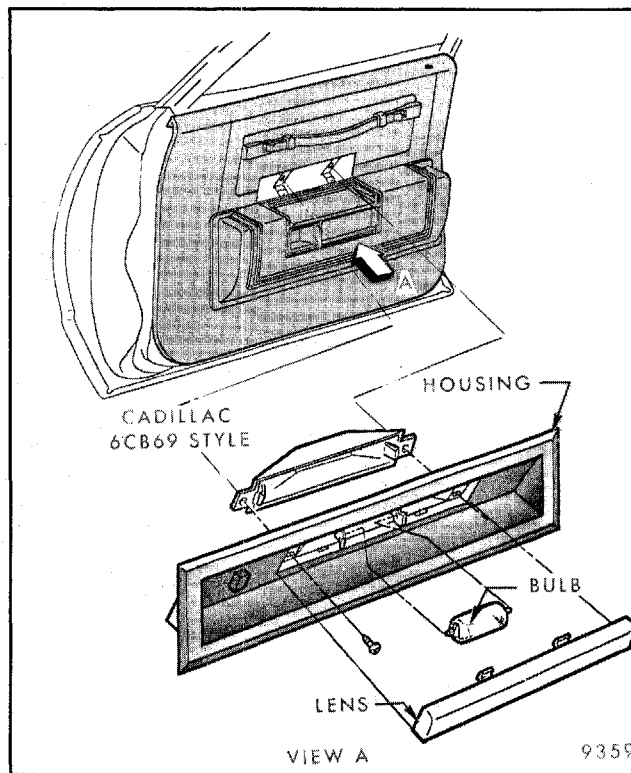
Reading Lamp Removal and Installation - Cadillac 6CB69 Style
